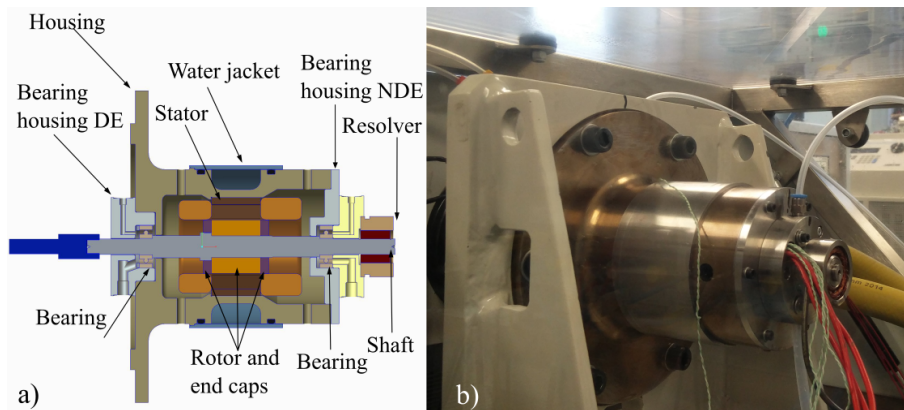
a) Section drawing of the built prototype showing the most important components, b) side view of the complete machine mounted on the bracket of the test rig.
